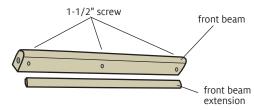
A - ATTACH FRONT BEAM EXTENSION
